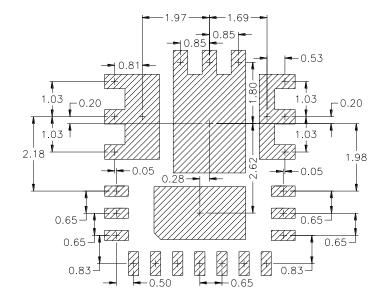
PCB Metal Pad Spacing (all dimensions in mm)
